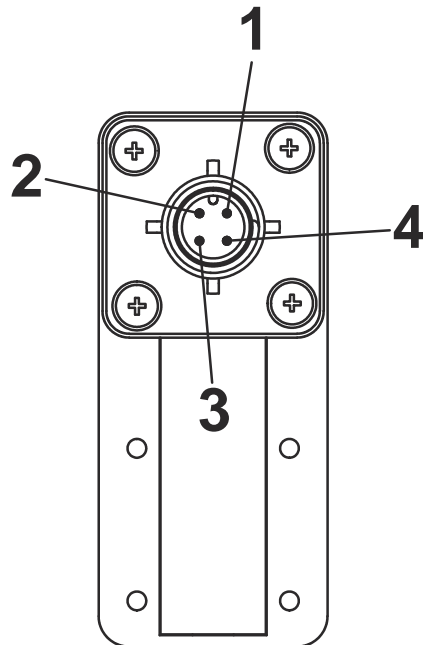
Pin-assignment, socket M12x1 (Form 30x70)
